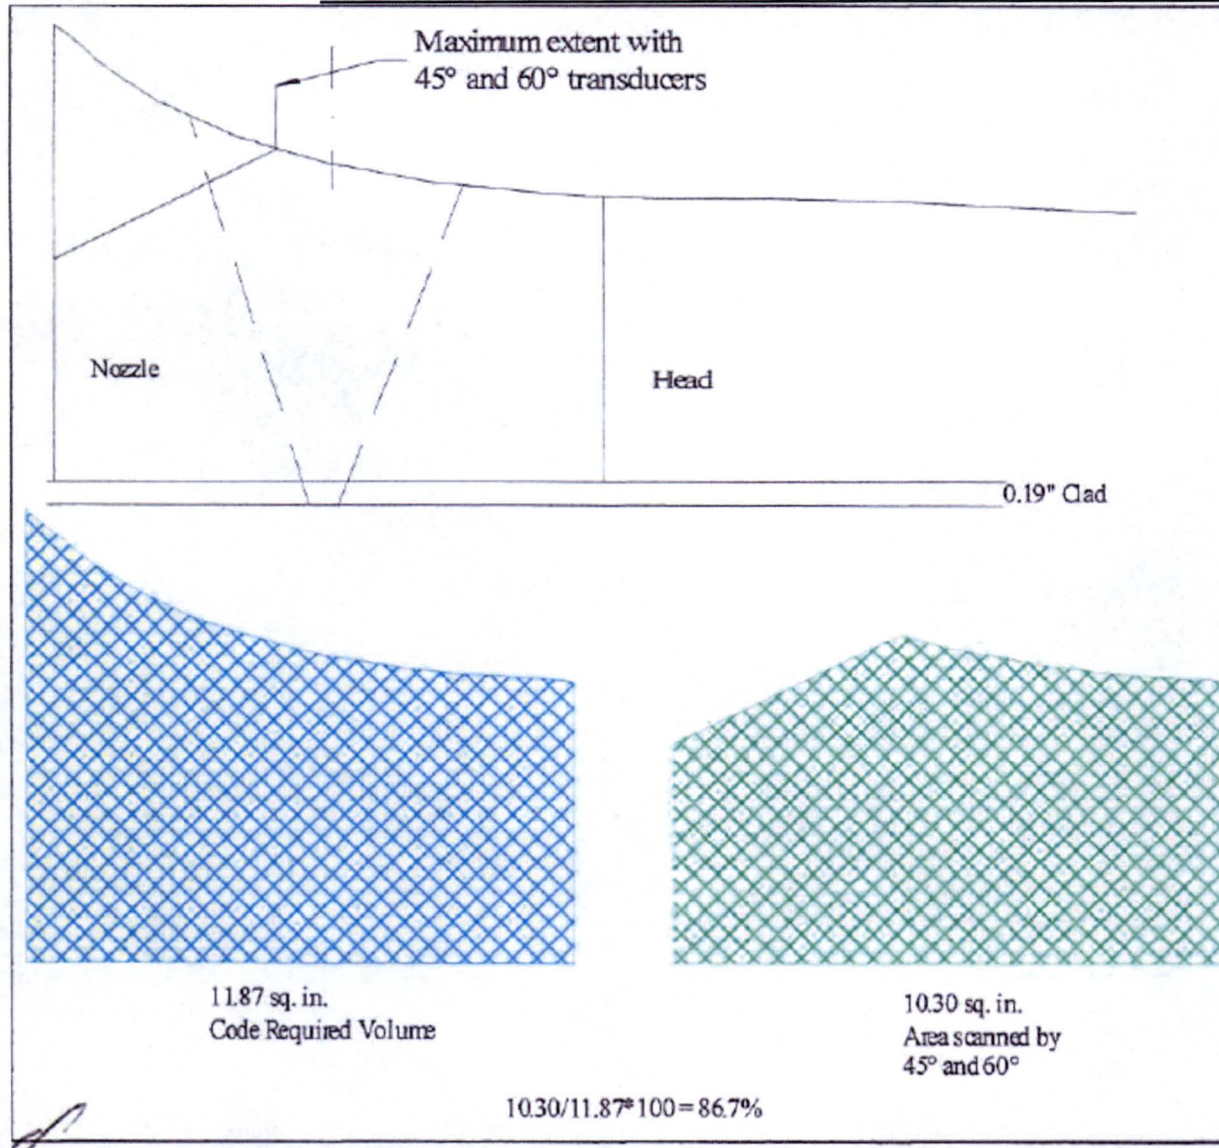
Weld 6"-2-RC-26 (Extracted from Reference DRAWING 2A-4)
